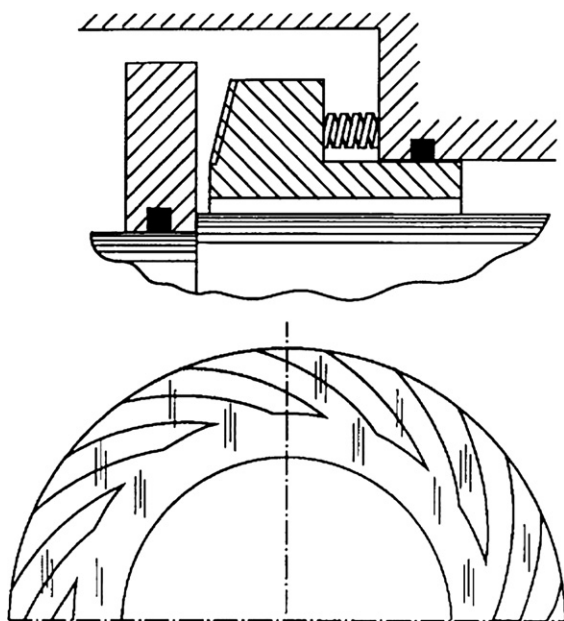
• Dry gas seal. Top: typical design for curved face — spiral groove non-contact seal; curvature may alternately be on rotor; Bottom: Typical spiral groove pattern on face of seal typical non-contact gas seal (Courtesy of John Crane Co.)
